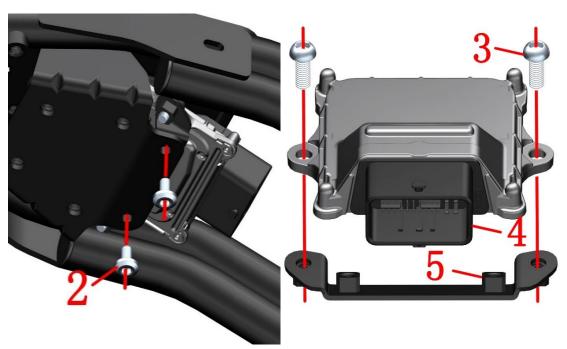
FRAME&ELECTRONIC COMPONENT		Electrical device component 3(MSE6.0)	CHK	\$
